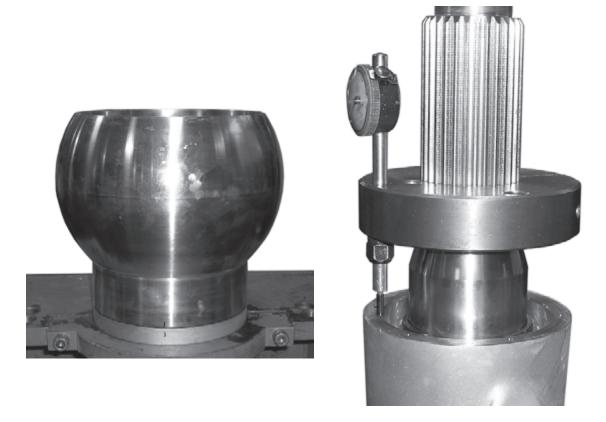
Lower Ball, Secure with Four Capscrews (left), and Turn Over and Install Dial Indicator T-21173-2 (right)
